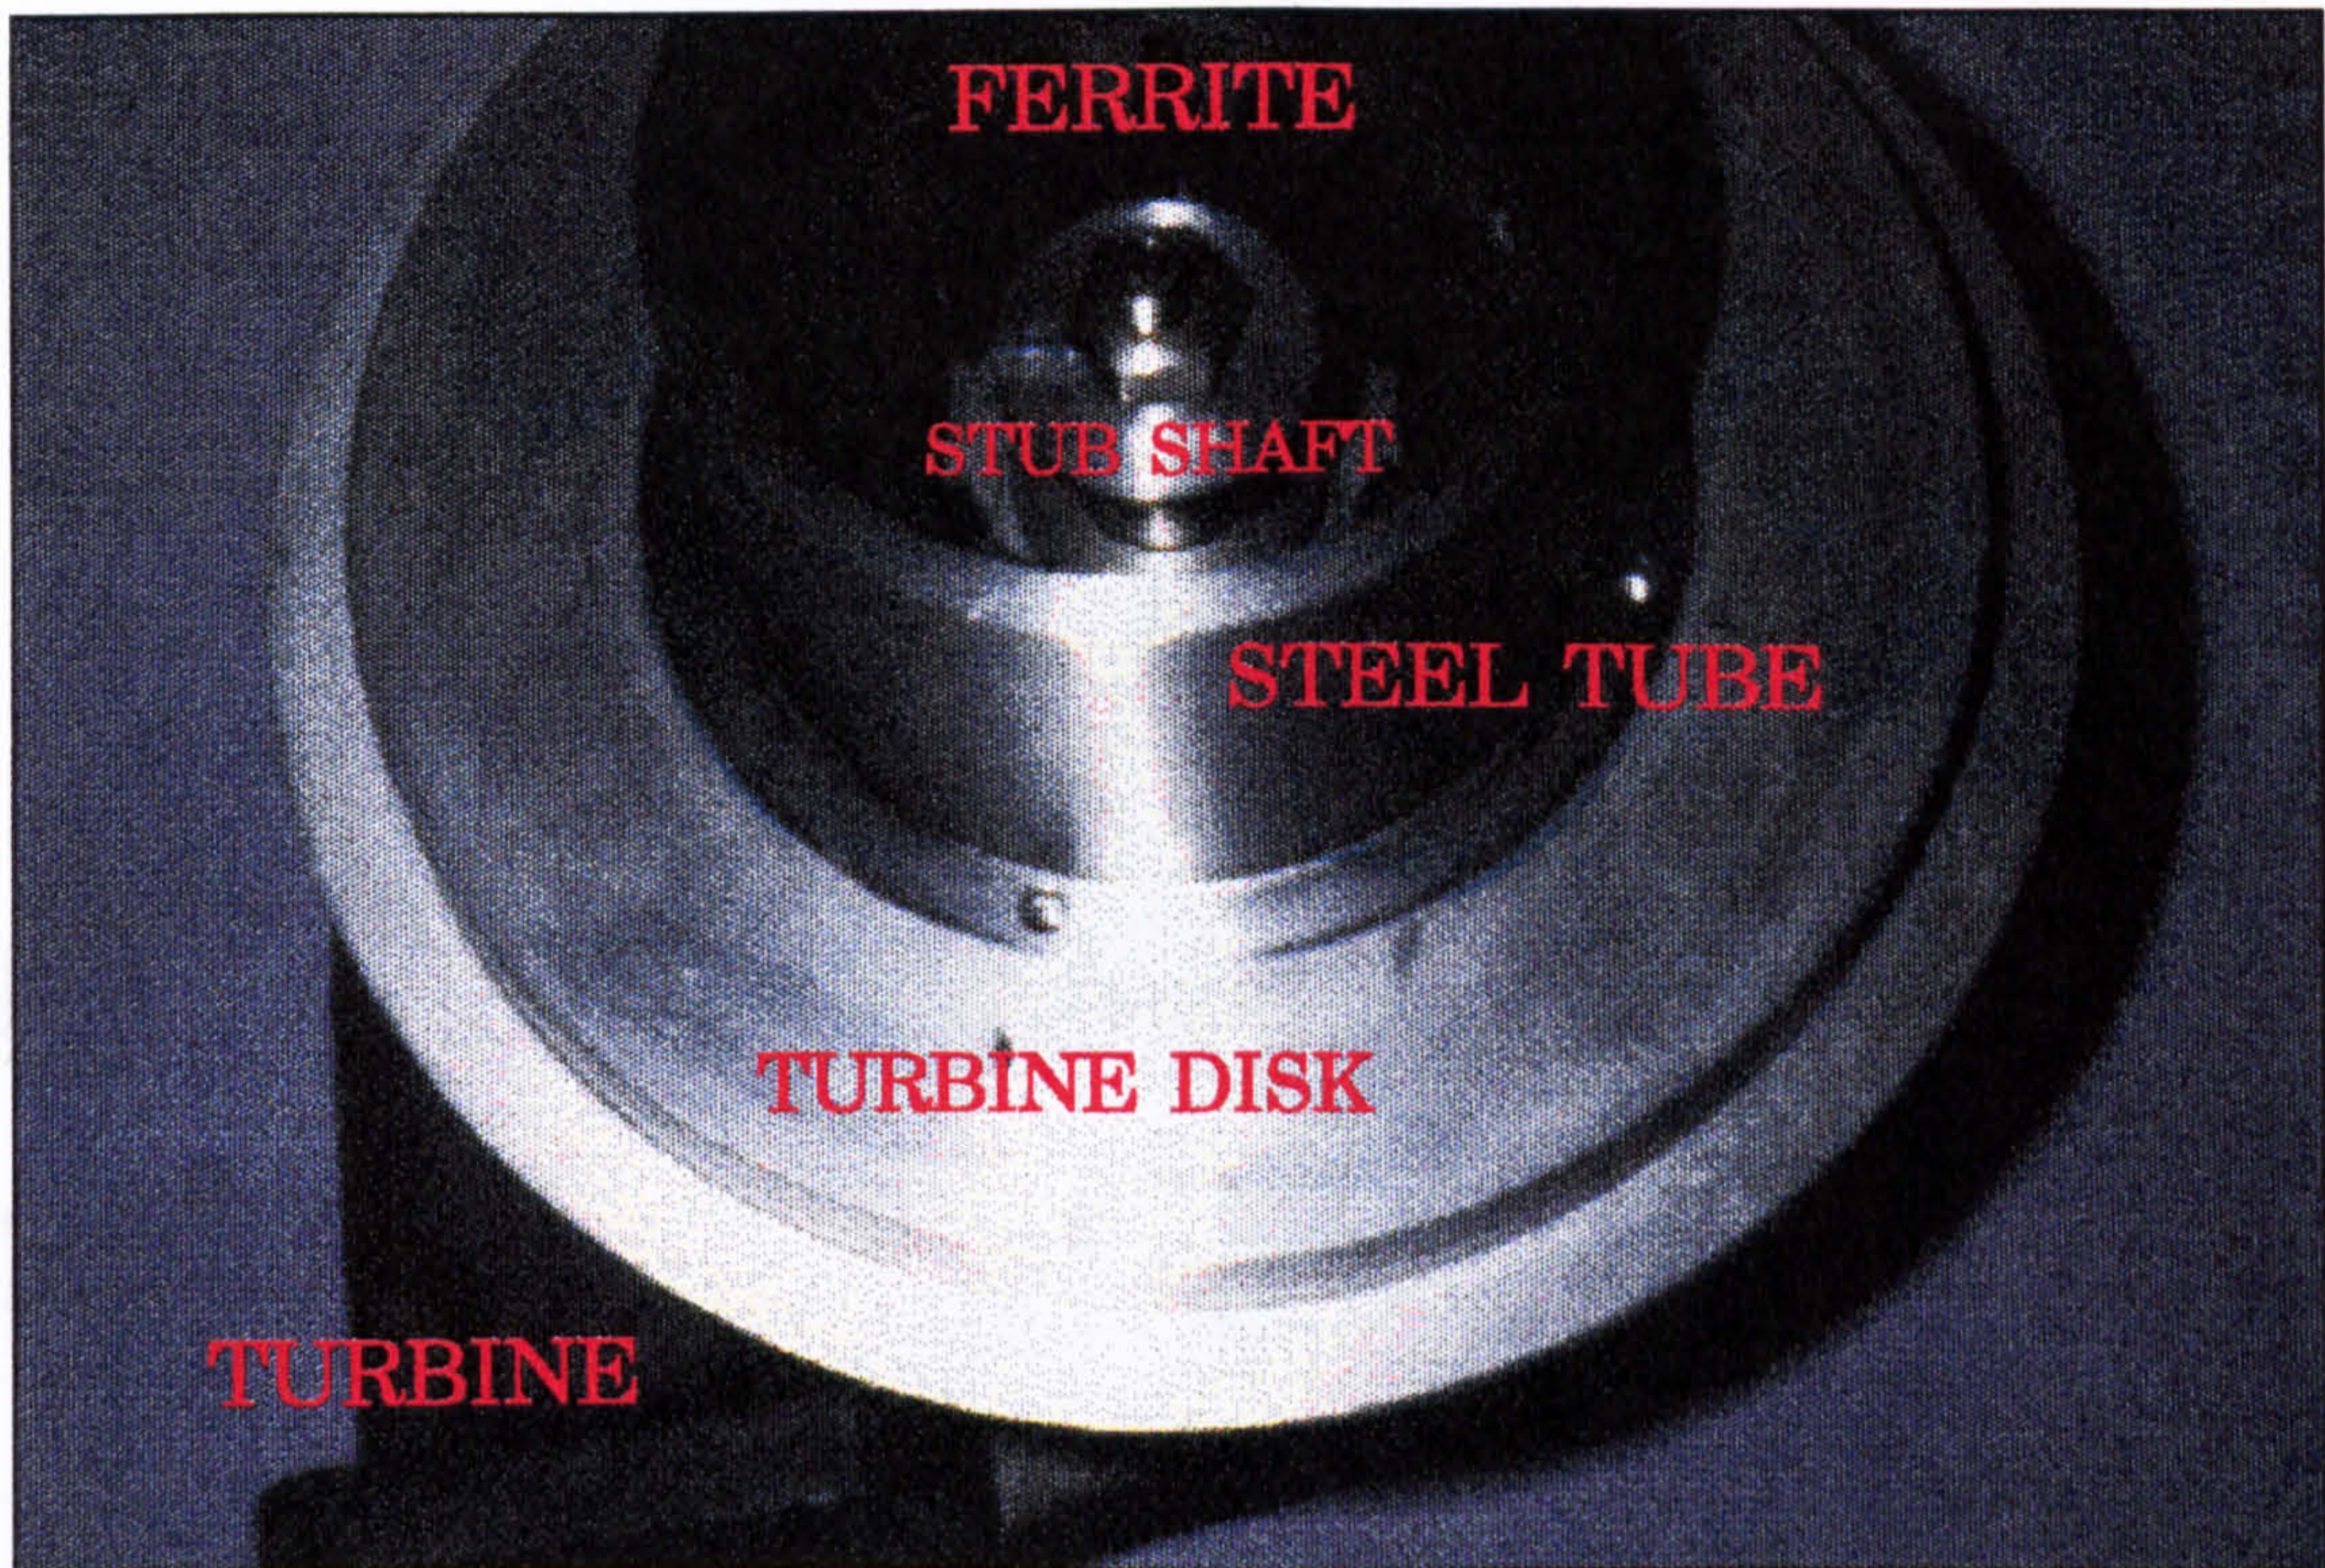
Photo showing the stator core inside the steel tube and its assembly to the air turbine.
